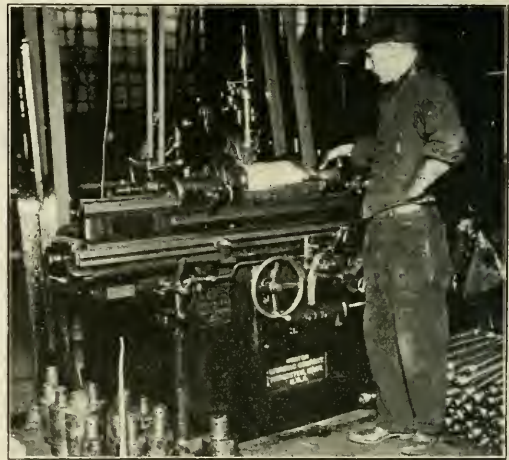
10-in. by 36-In. Plain Cylindrical Grinder Finishing Wrist Pin
